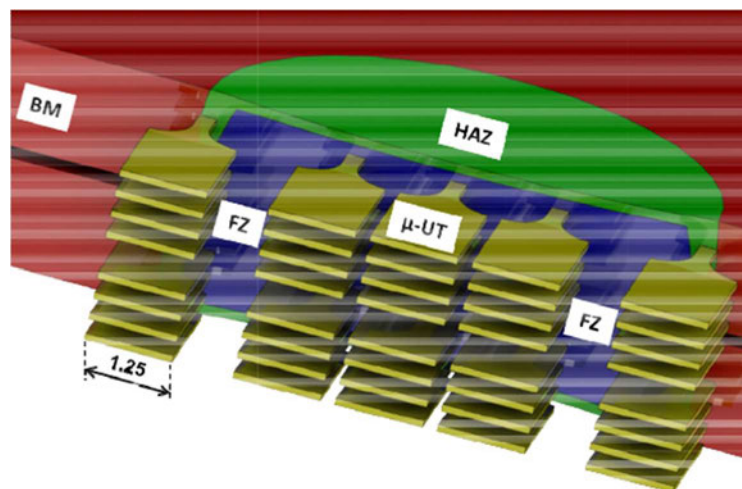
Location of miniature tensile coupons extracted from the weld and HAZ [60].
